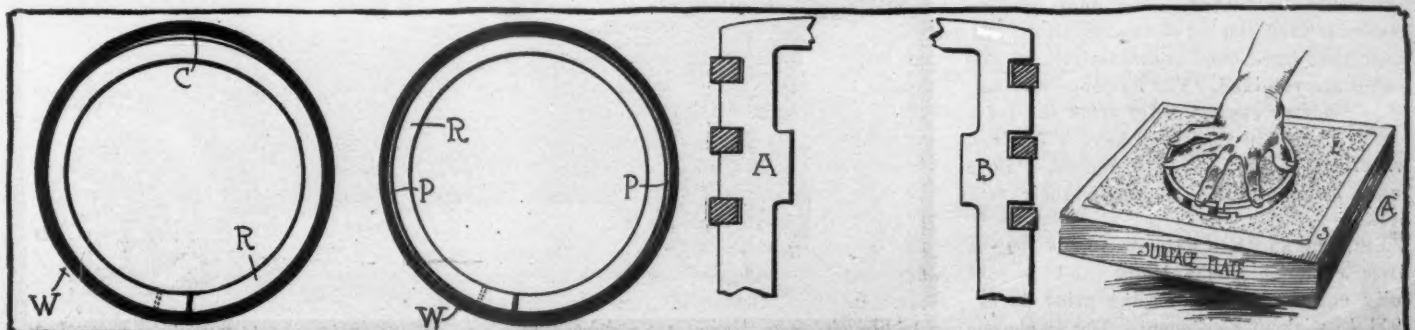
SHOWING EXAMPLES OF PROPER AND IMPROPERLY FITTING RINGS, AND HOW TO DRESS THEM DOWN
